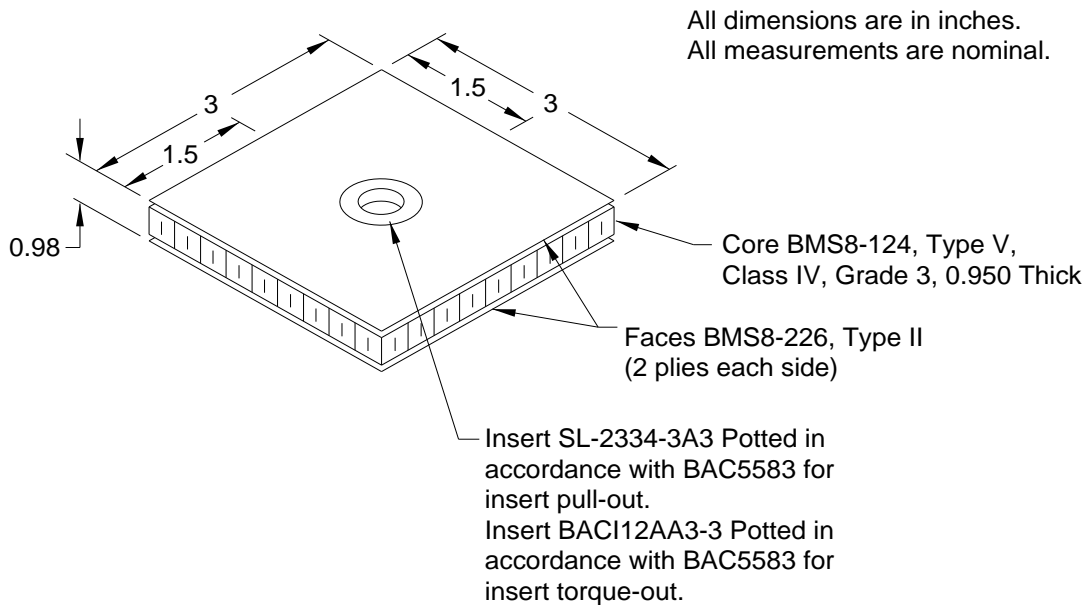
TENSILE PULL-OUT AND TORQUE TEST SPECIMEN CONFIGURATION
